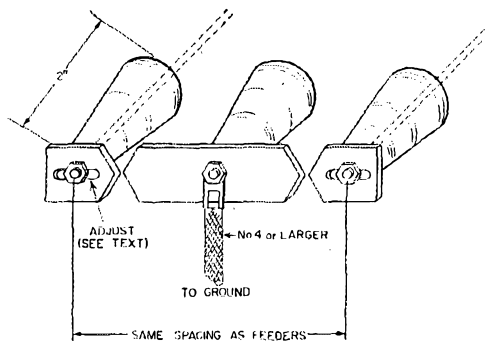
Constructional details for a homemade lightning arrester. As mentioned in the text, the gaps between the center plate and outer plates should be $\frac{3}{16}$ -inch.
